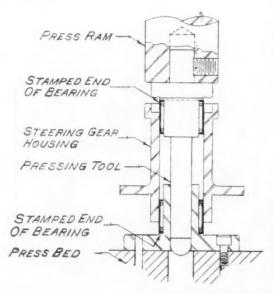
Arbor press set up for inserting needle bearings (having thin-section outer races) into steering-gear housing to avoid damaging the fragile bearings
